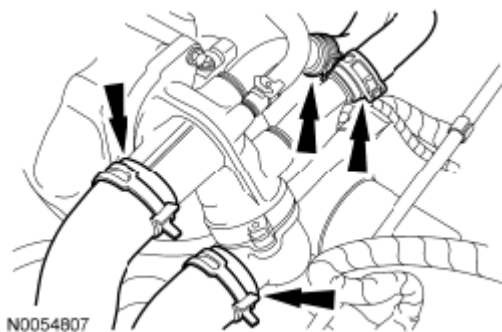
Locating Upper Radiator Hose, Lower Radiator Hose & Heater Hoses
